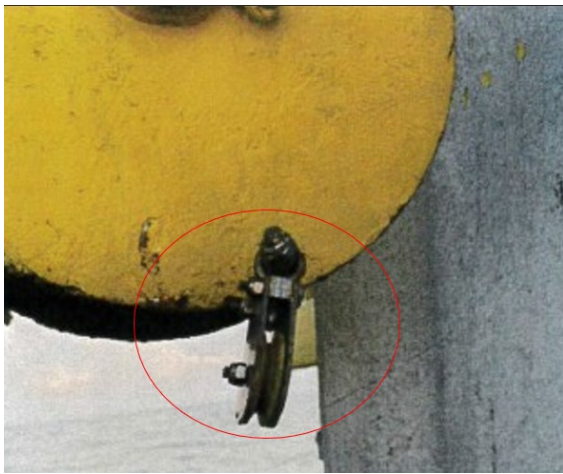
Damaged A2B pulley with bent bolt caused the cable to ride on the frame instead of the pulley wheel.
